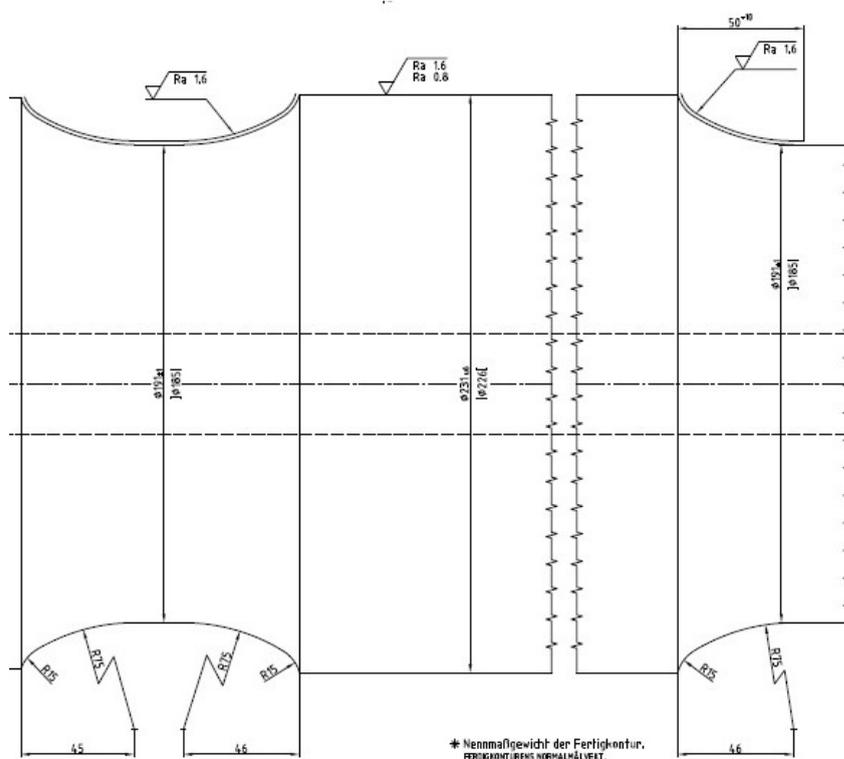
Technical drawing of an axle with requirements to surface finish
